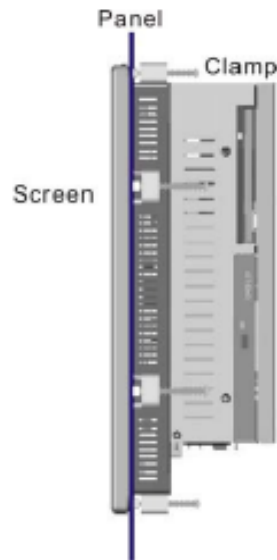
Tighten the Panel Mounting Clamp Screws
